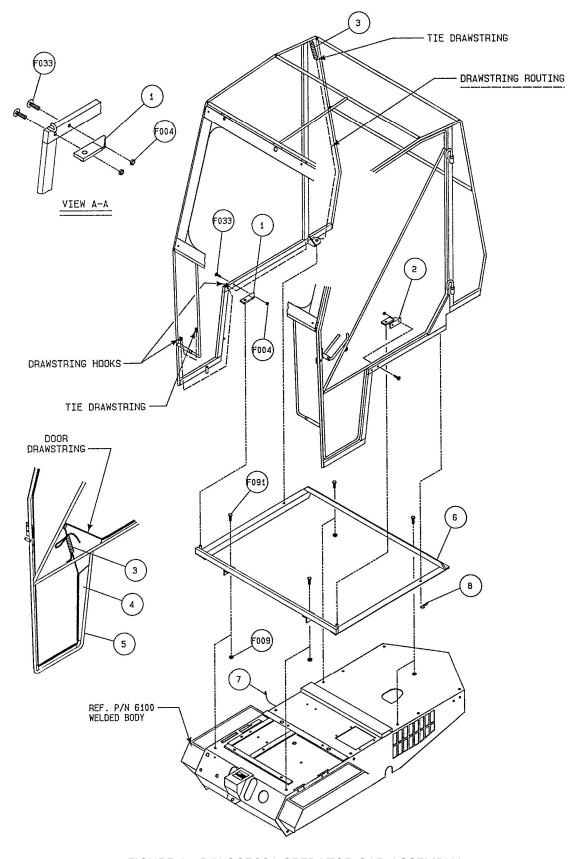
P/N SC5661 OPERATOR CAB ASSEMBLY
